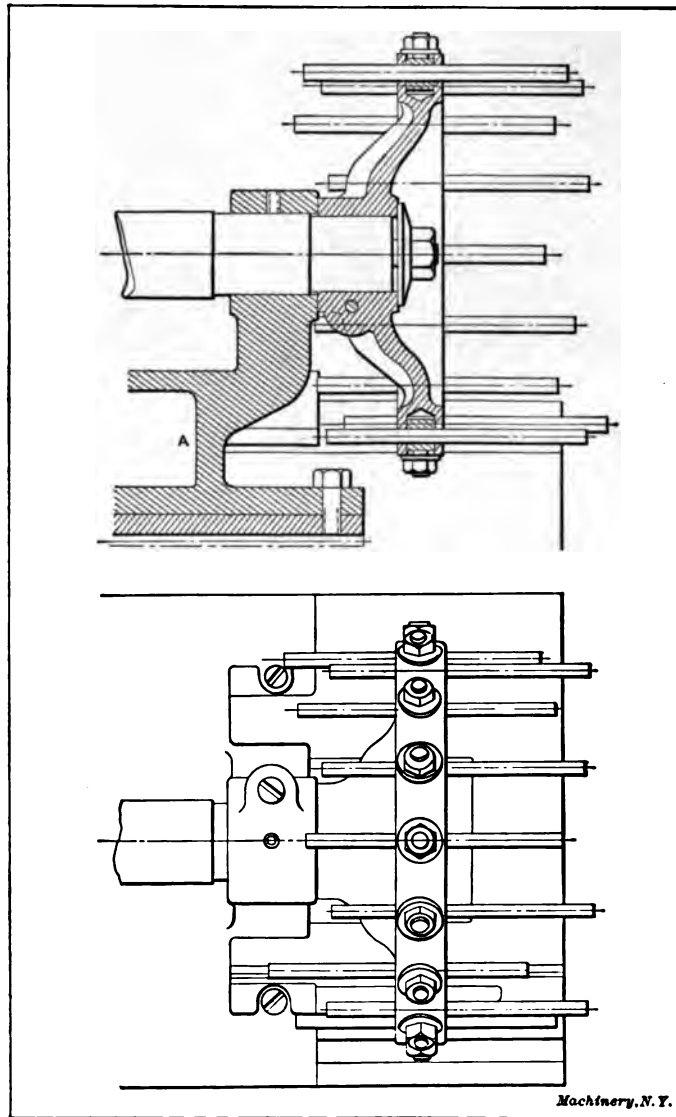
Dead Stops used on a Turret Lathe of German Make
